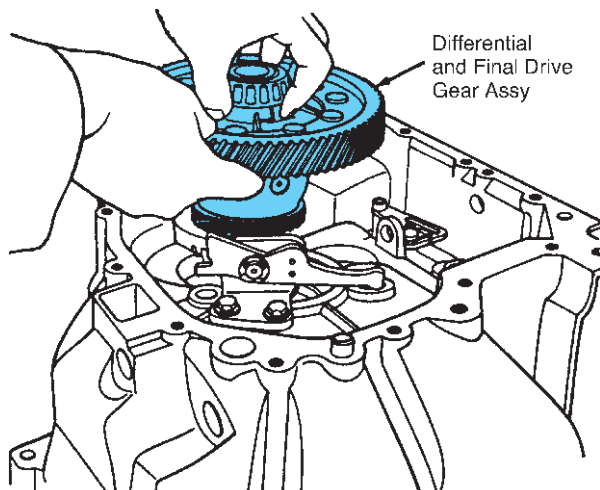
On this transaxle, the differential assembly is removed after the gear assemblies have been removed. (Courtesy of Ford Motor Company)
